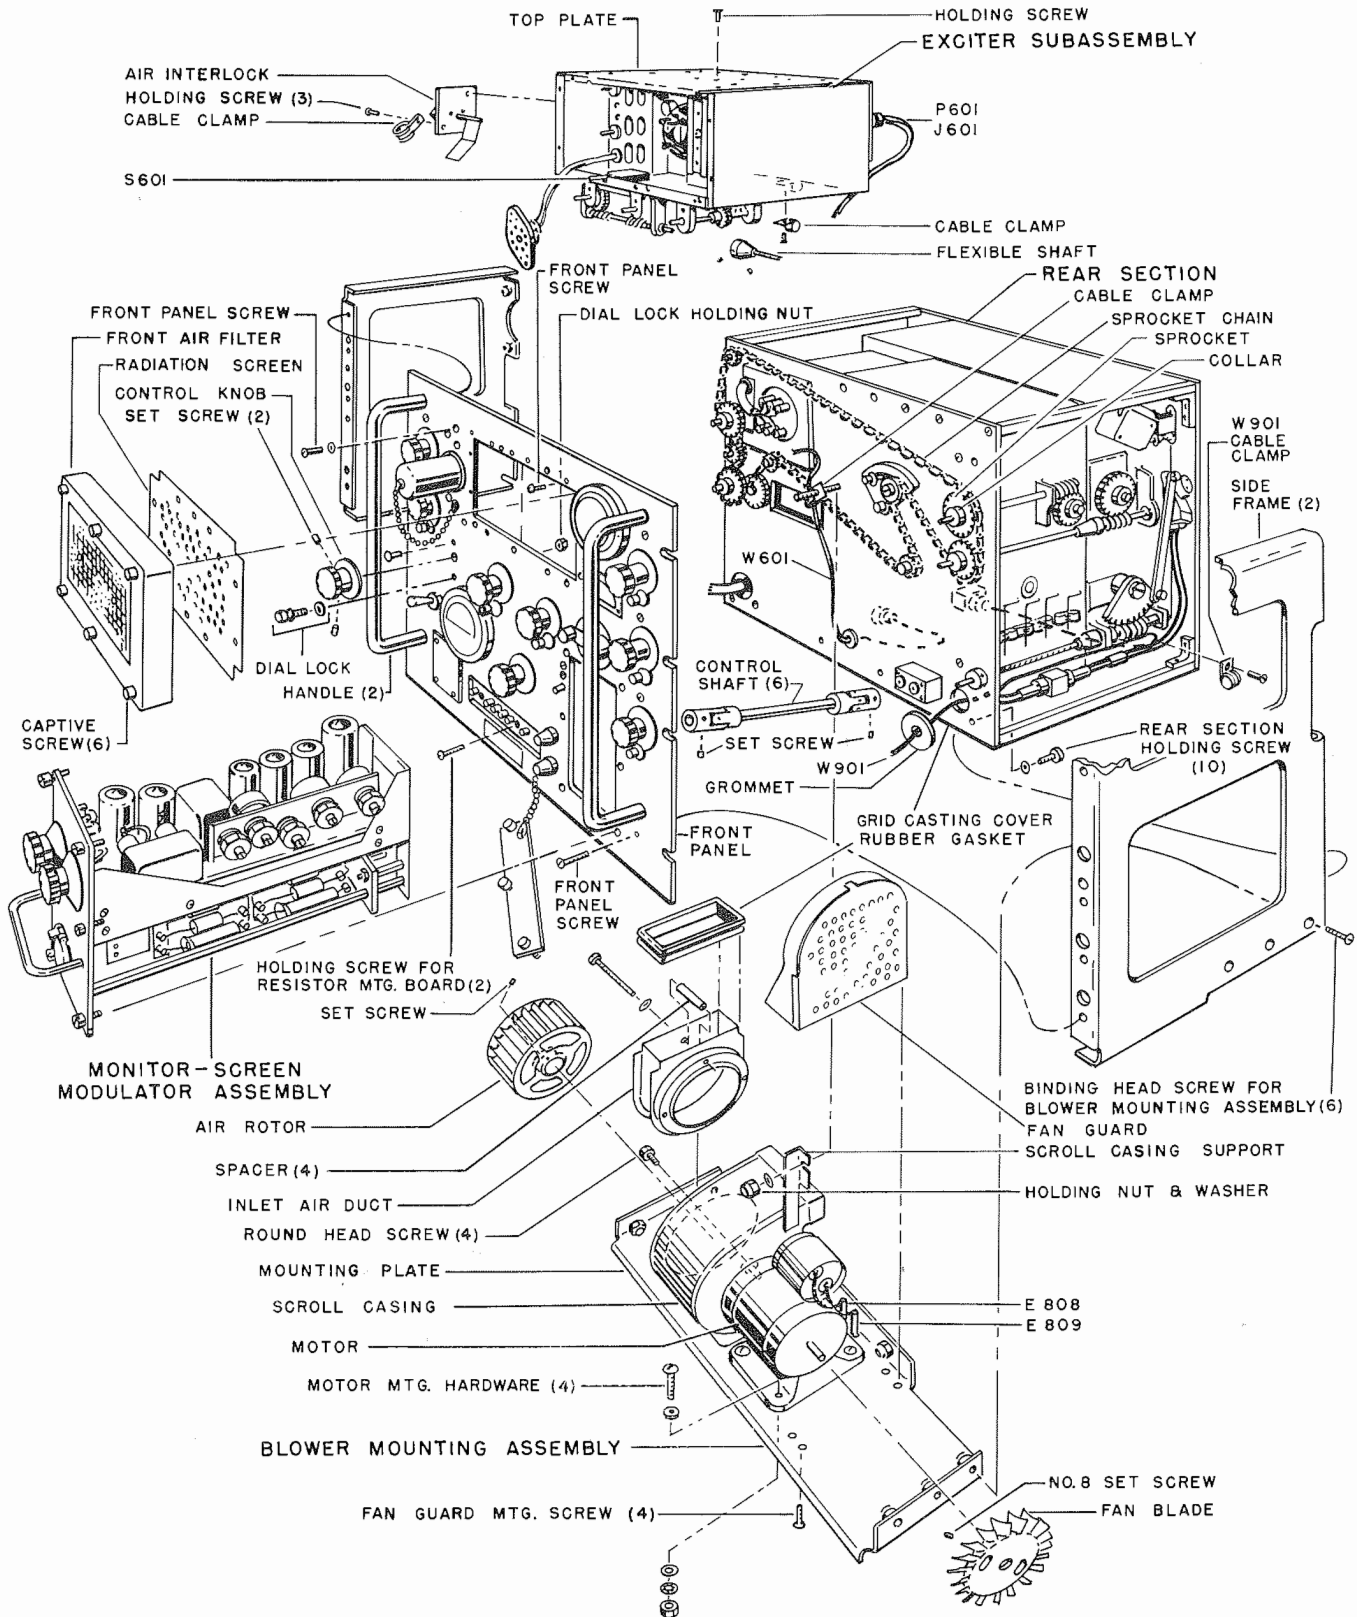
Radio Transmitter, Removal of Assemblies and Subassemblies
